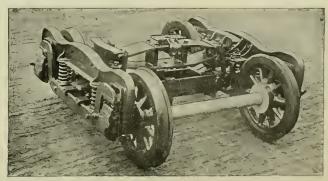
,-Motor Truck Built by McGulre Manufacturing Company for Lake Street Elevated Railway.
